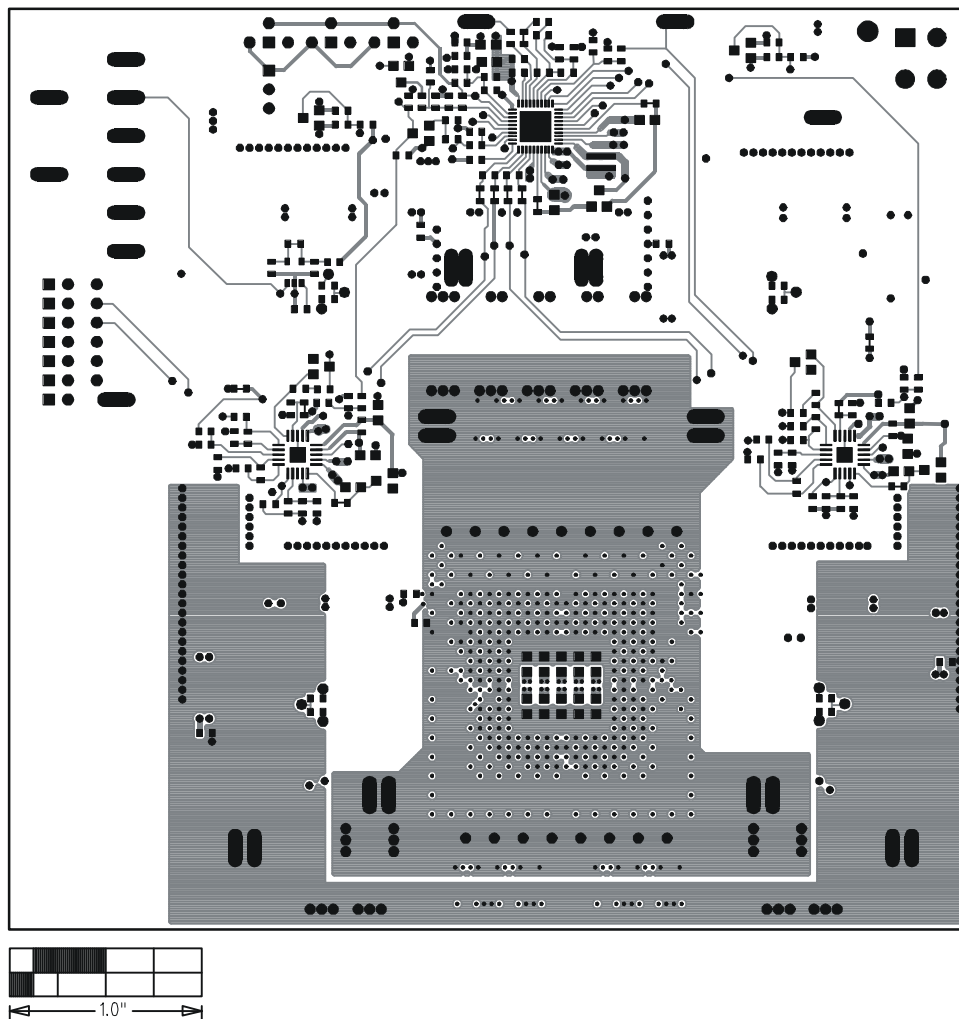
MAX1544/MAX1545 EV Kit PC Board Layout – Bottom Layer
